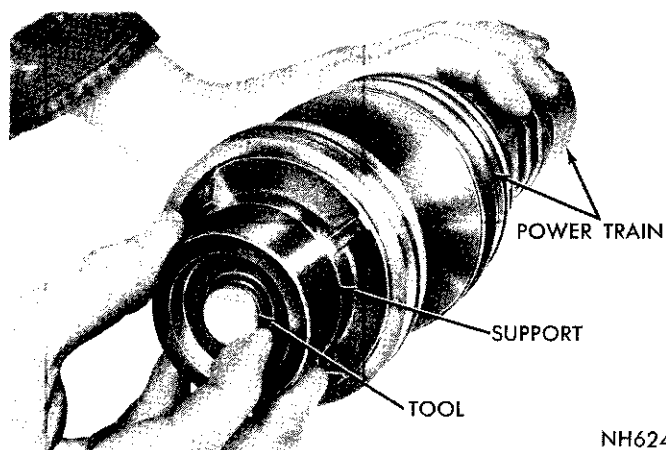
Retaining Bearing Rollers with Arbor Tool
